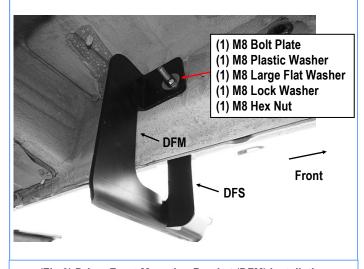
Driver Front Mounting Bracket (DFM) and the Driver Front Support Bracket (DFS) Assembly
